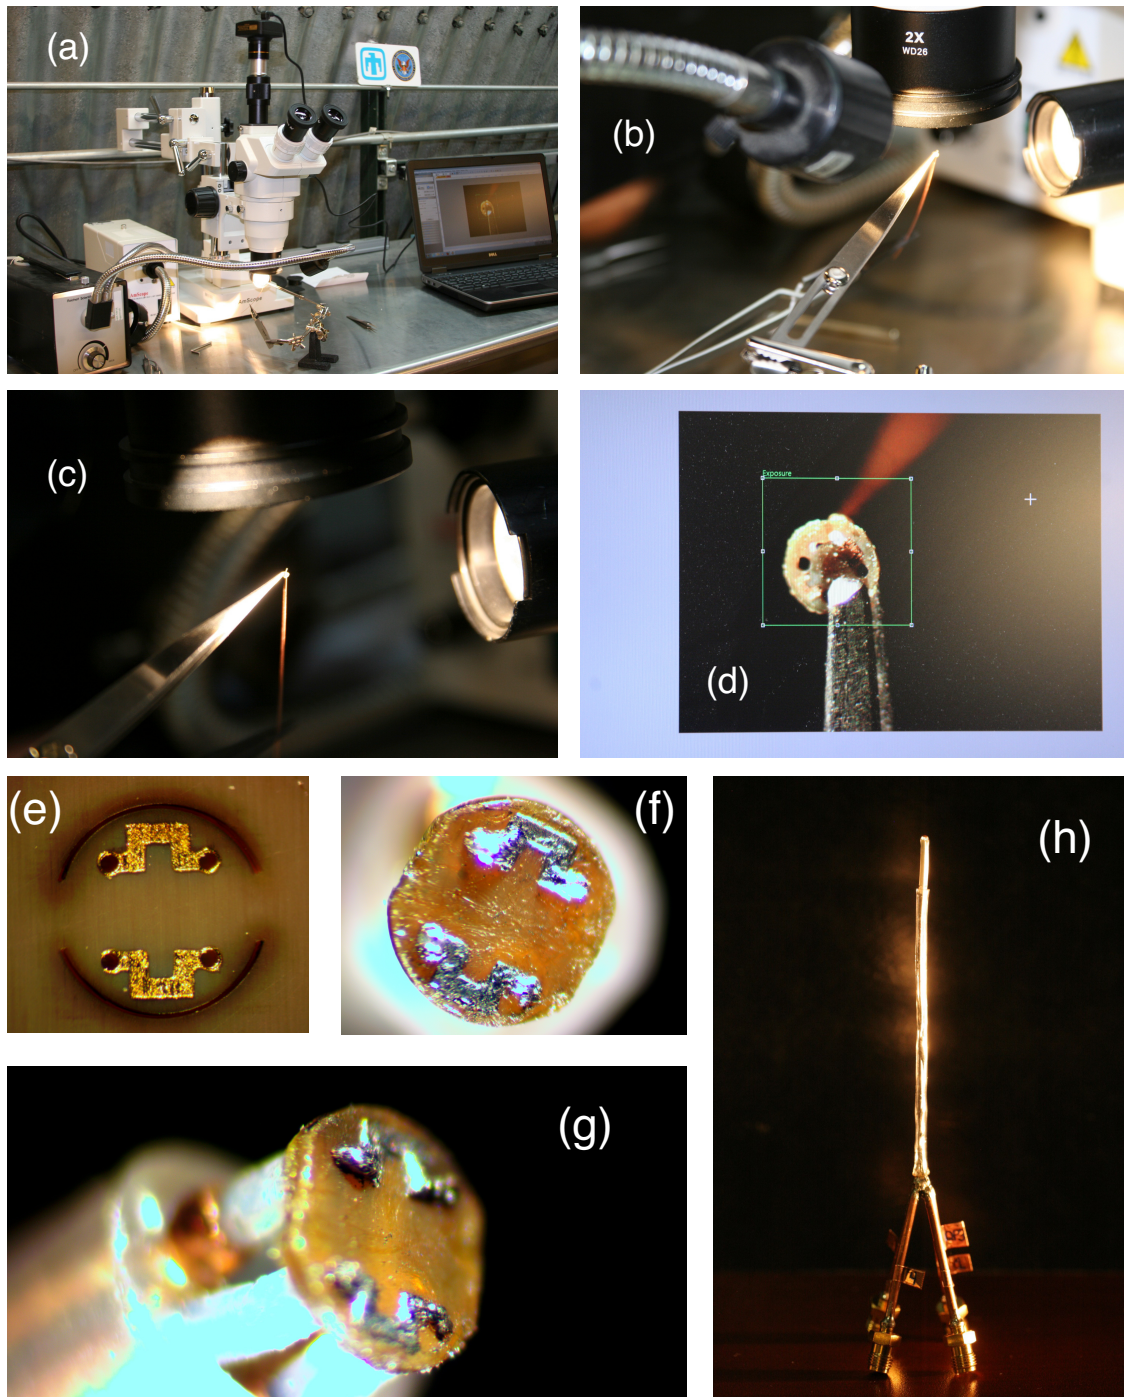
Photographs of the various scale sizes involved with quad-pack assembly. (a) Tweezers holding an 0.020" semi-rigid coaxial cable soldered to a quad-pack PCB under the microscope that was purchased to enable quad-pack assembly. (b) That in (a) zoomed in. (c) That in (b) zoomed in. (d) That in (c) zoomed in. In (d), the poor quality of the PCB traces and vias that resulted from earlier PCB fabrication attempts at local shops is apparent. (e) The much improved PCB trace and via quality obtained from Sierra Circuits Proto Express in California. (f) That in (e) after solder has been applied to assemble the quad-pack. (g) Slightly rotated view of that in (f) for perspective. (h) Full view of a completed quad-pack assembly.
